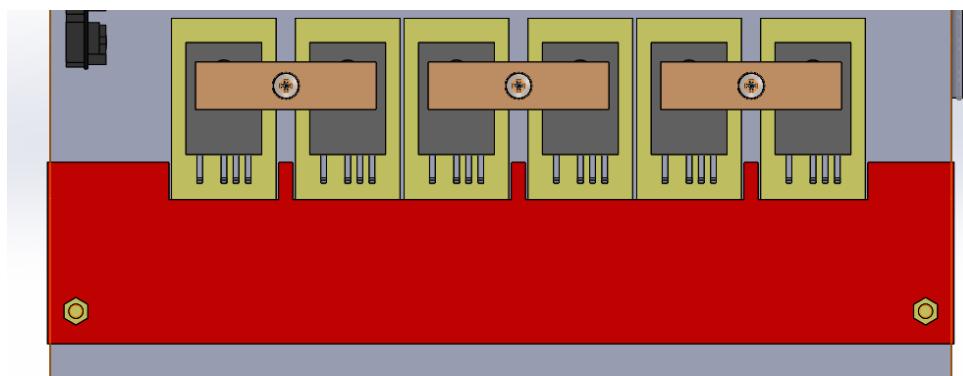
Heat Sink/Baseplate Assembly with Insulator and Pressure Bars.
